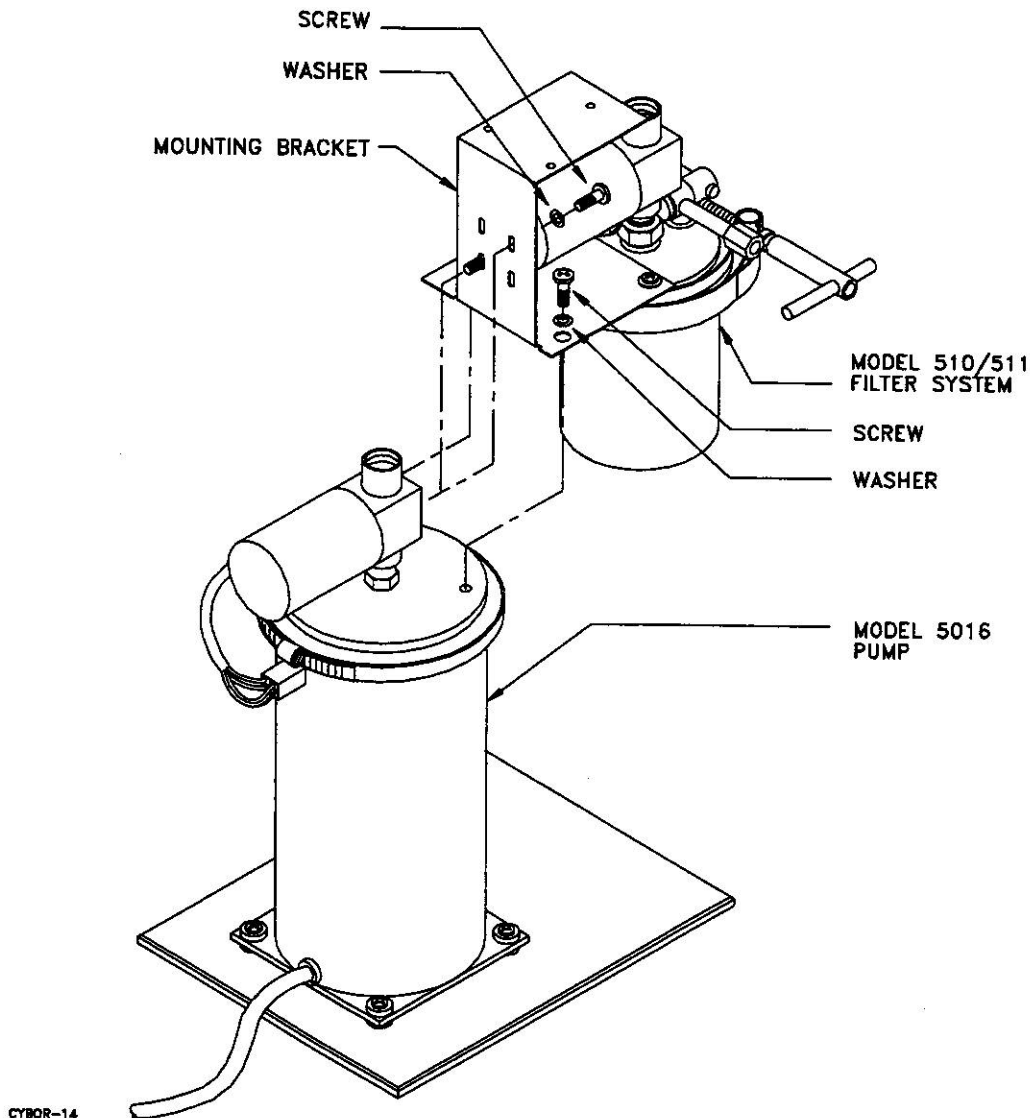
Filter System Model 510/511 Removal and Replacement
